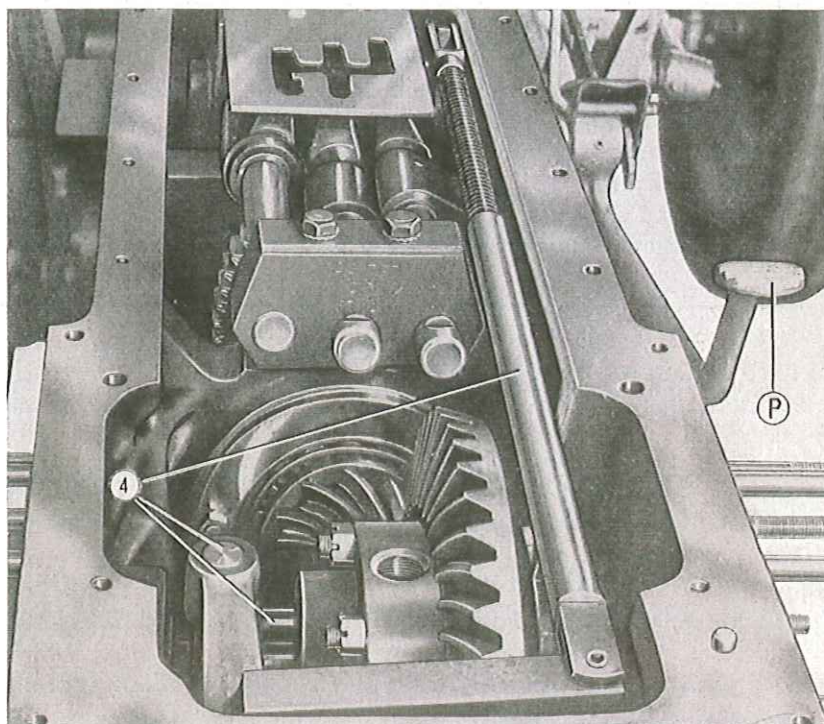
Top view of gearbox, gear-shift and differential lock.
